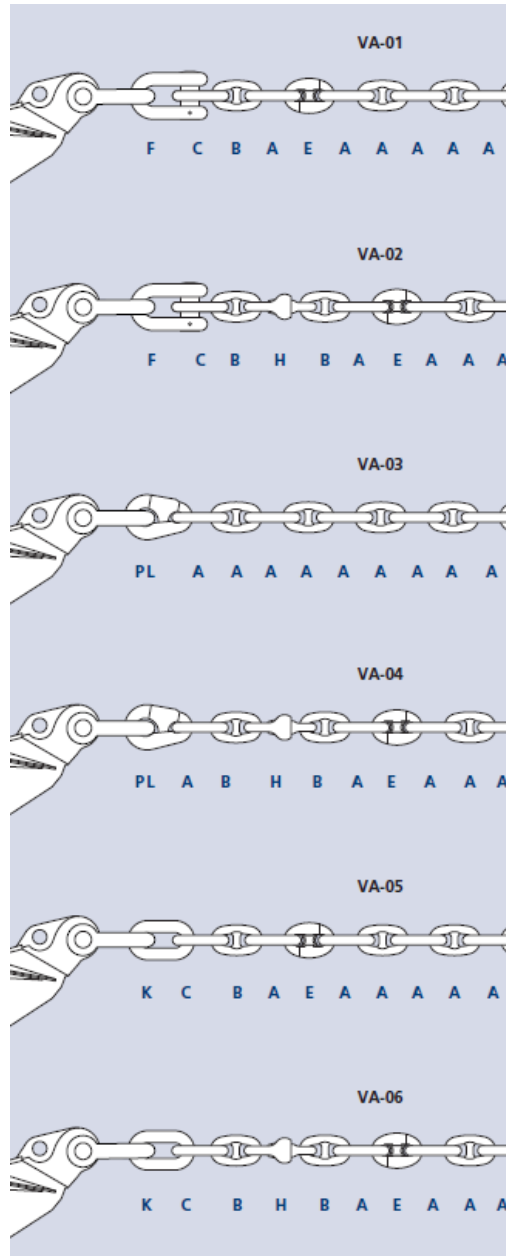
Typical Connections for Drag Anchors and VLAs <sup>[7]</sup>
